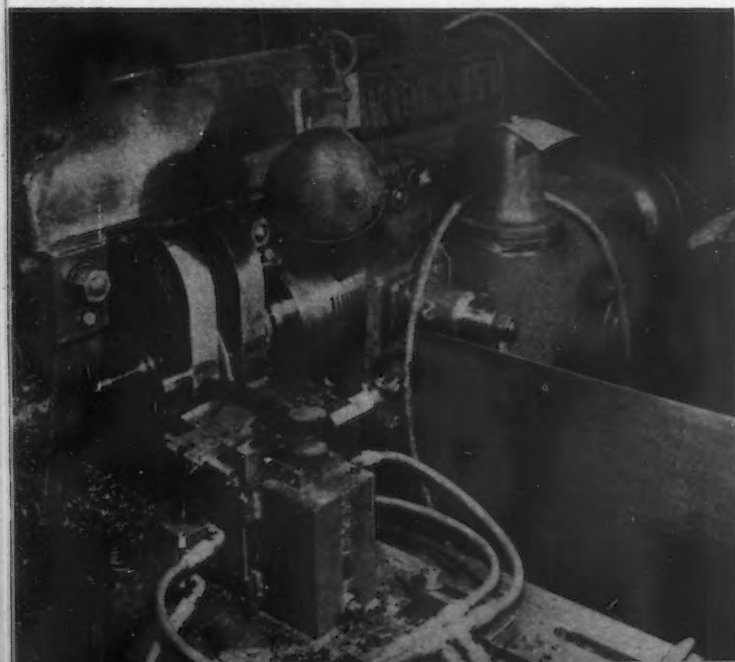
Pneumatically operated clamping fixture used in Test 14. Such a fixture is essential in reducing the proportion of loading and unloading time to actual cutting time in hyper milling.
